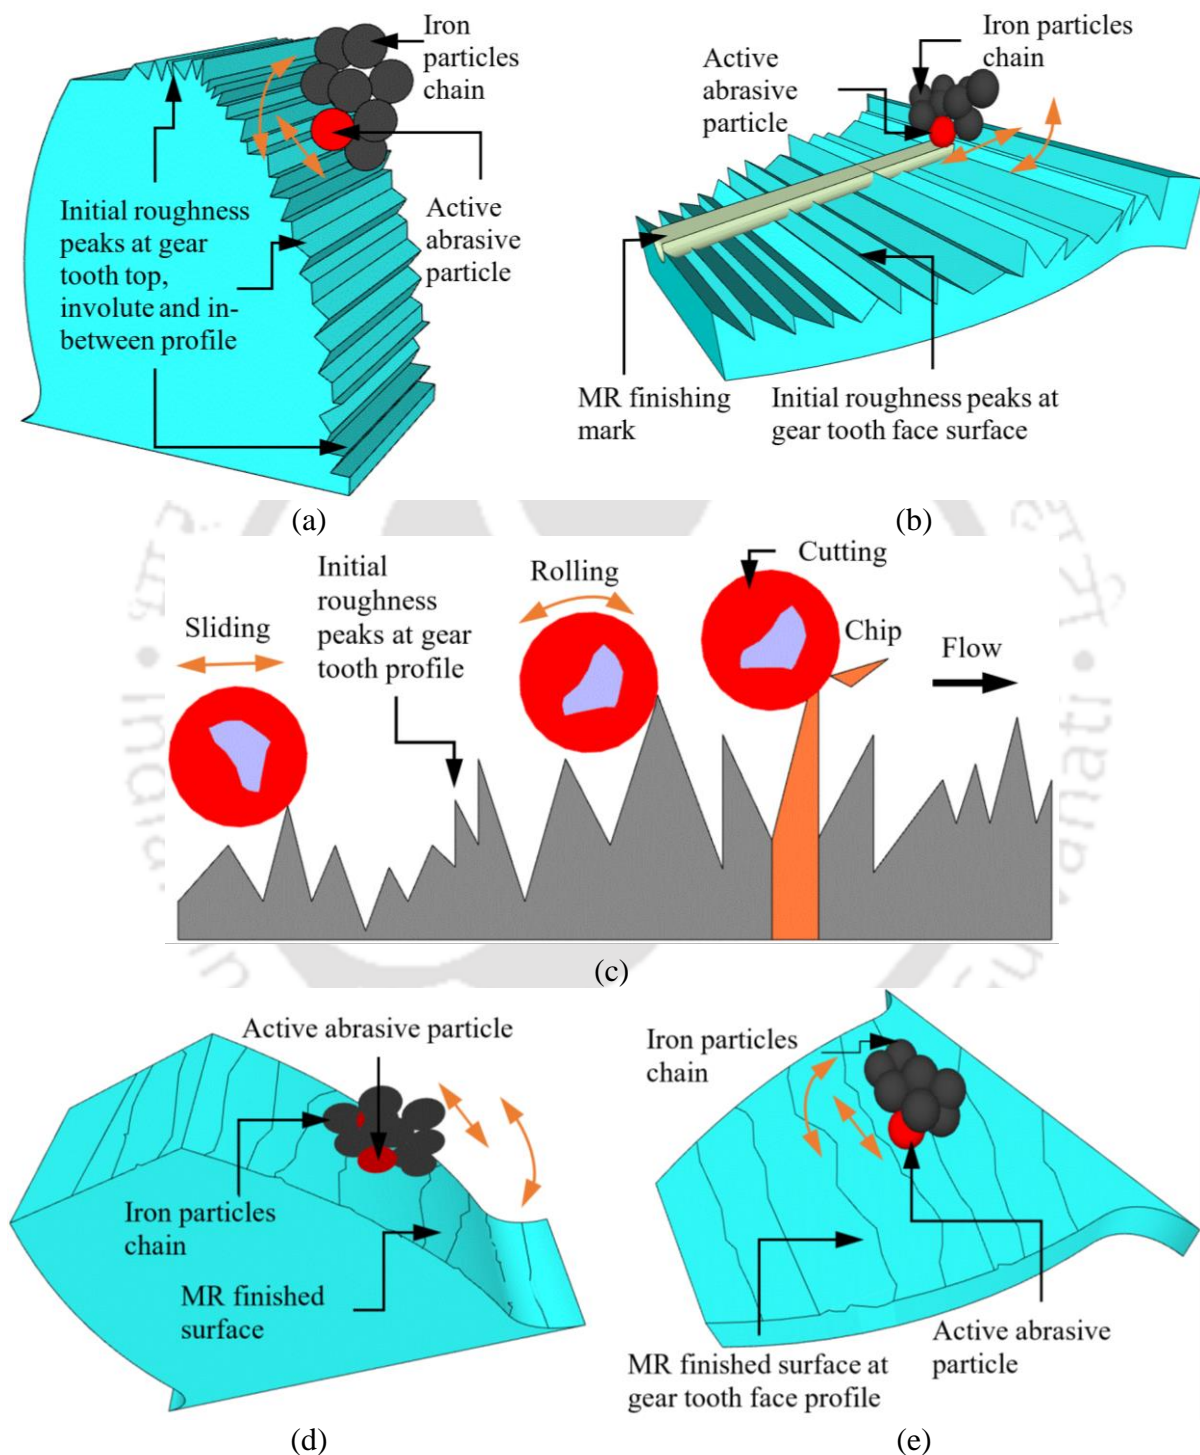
Surface roughness peaks at the tooth (a) top, involute, in-between and (b) face profile of miniature gear before finishing, (c) different states of a single abrasive particle on gear surface, final roughness profile after R-MRFF processing at tooth (d) top, involute, in-between and (e) face profiles of a miniature gear
